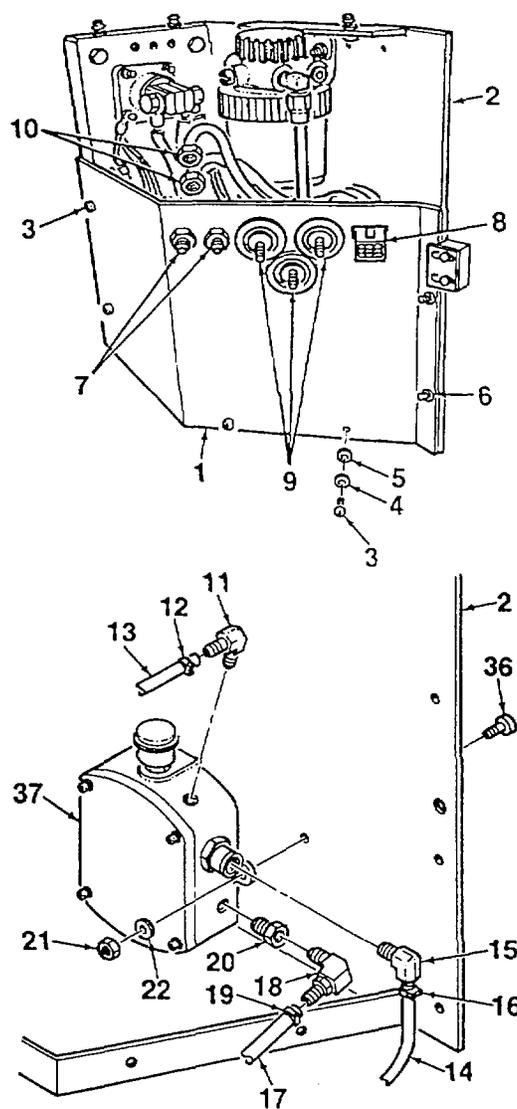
Float Valve Housing (Sheet 1 of 4)
